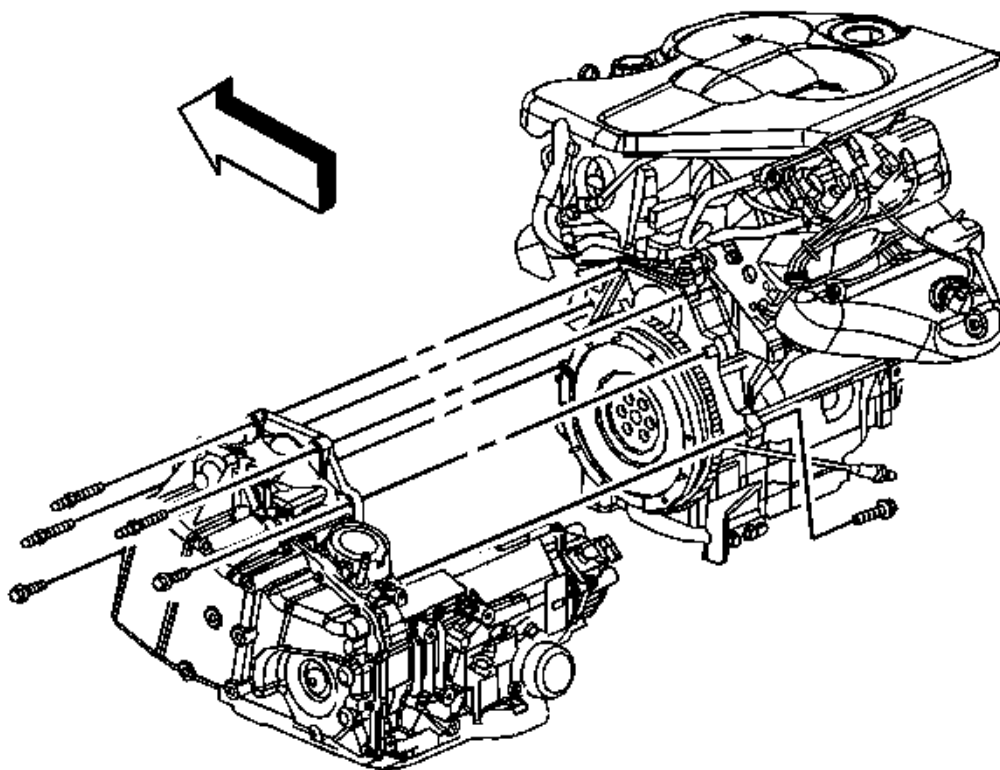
Transaxle-To-Engine Bolts/Studs (A/T)
